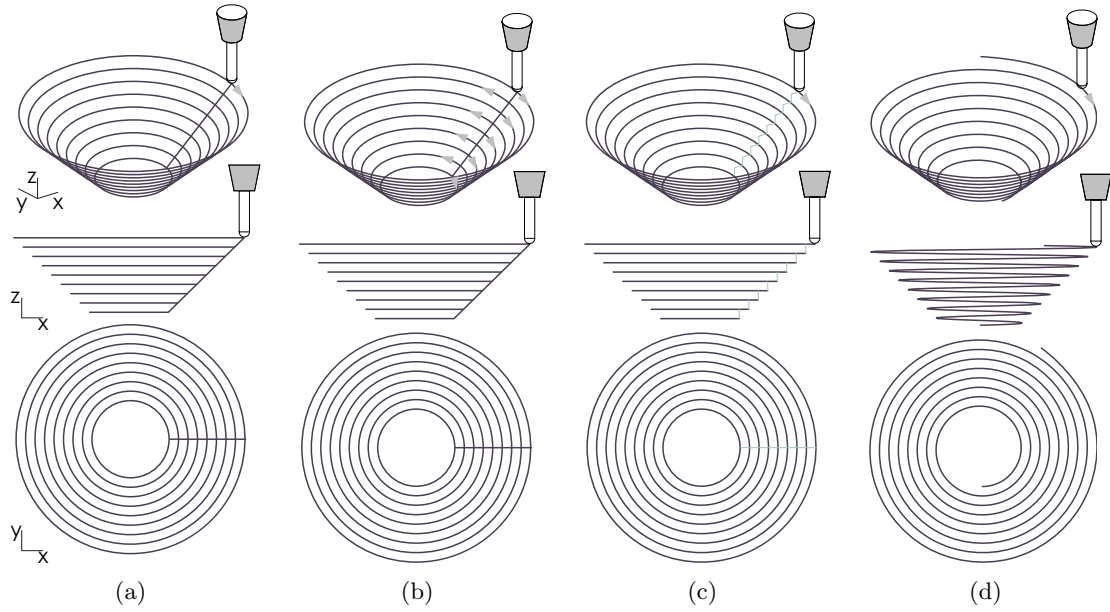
Constant z step tool path types for SPIF: (a) contoured, (b) alternating, (c) stepped, (d) helical.
